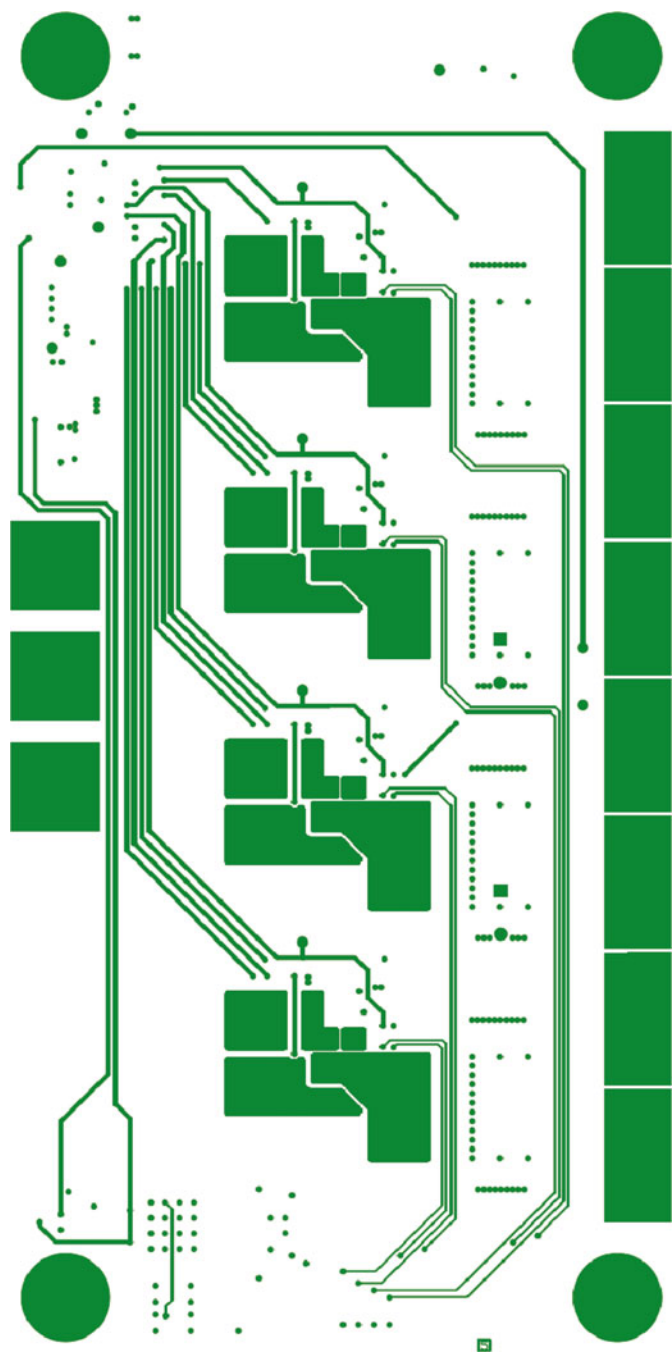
PCB design of top layer corresponding to the test board of Fig. [G.12](#)
